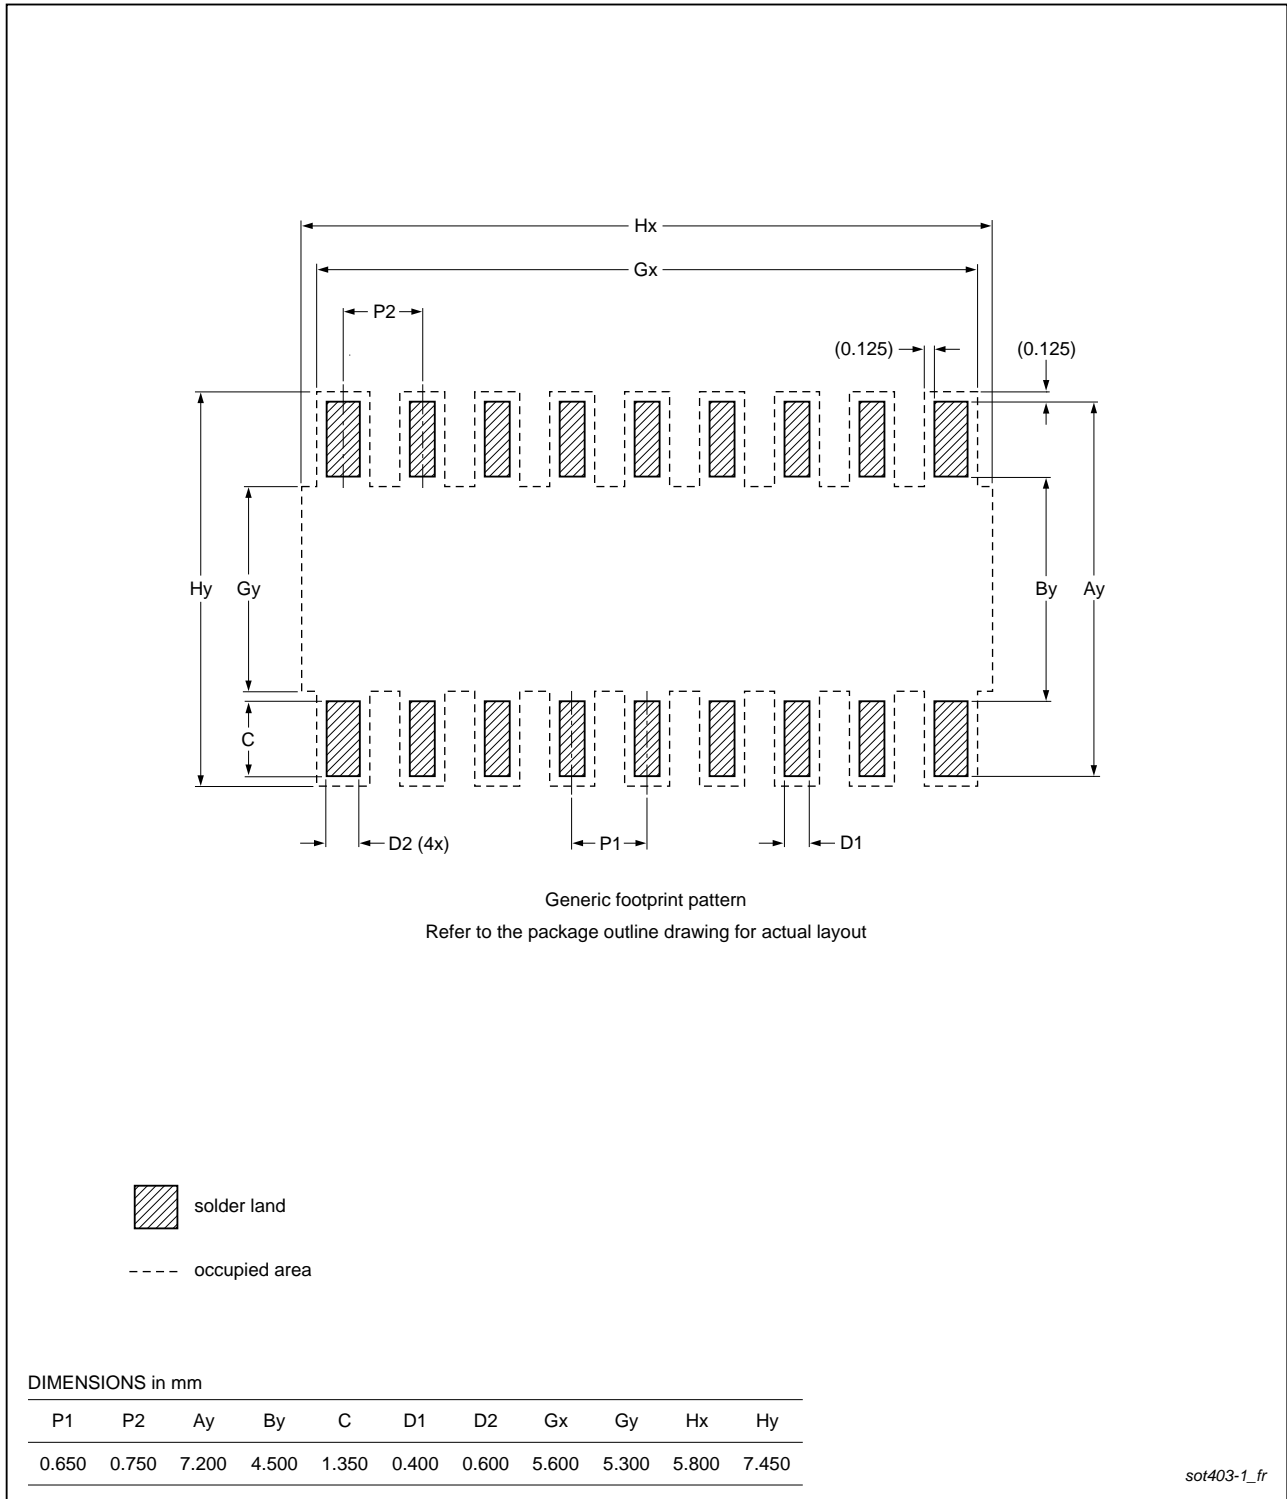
PCB footprint for SOT403-1 (TSSOP16); reflow soldering
